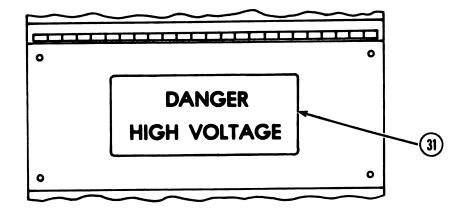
Switchbox Assembly (Sheet 1 of 3)
